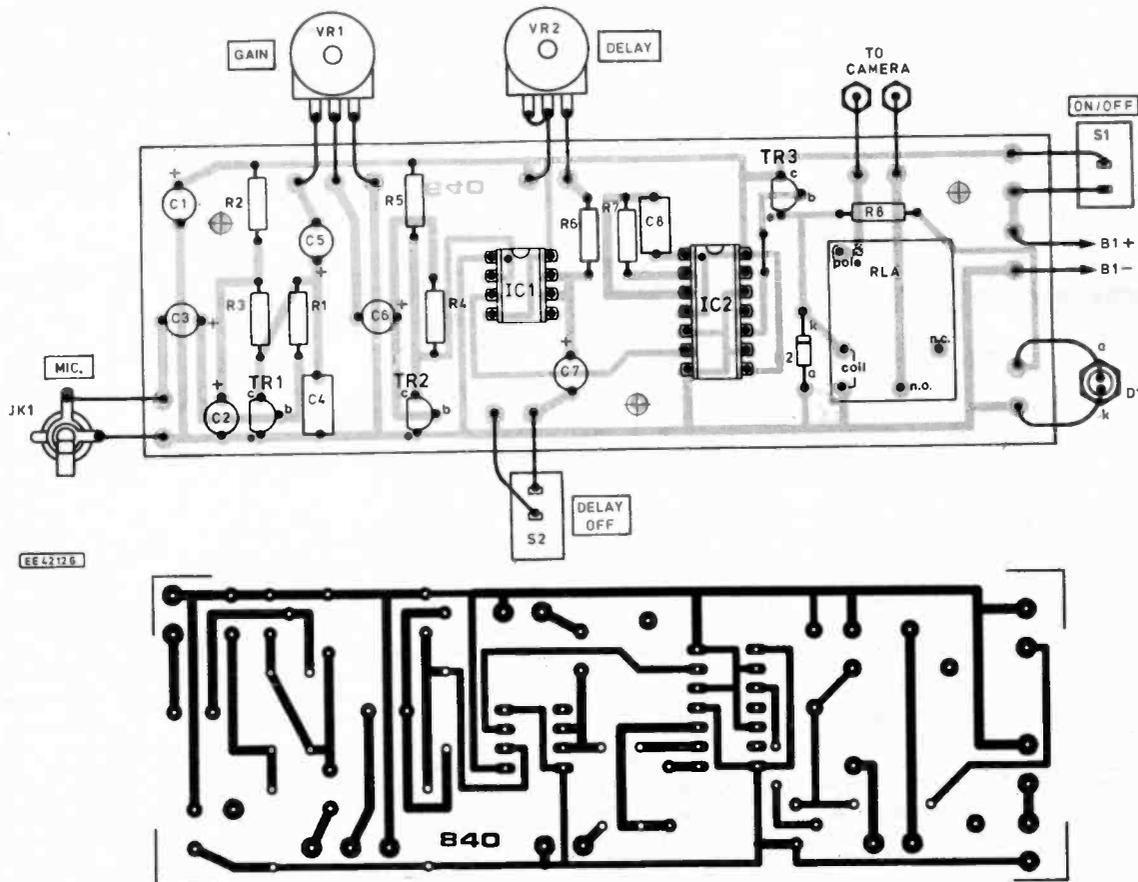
Printed circuit board component layout and full size copper foil master pattern for the Sound Activated Camera Trigger unit.
